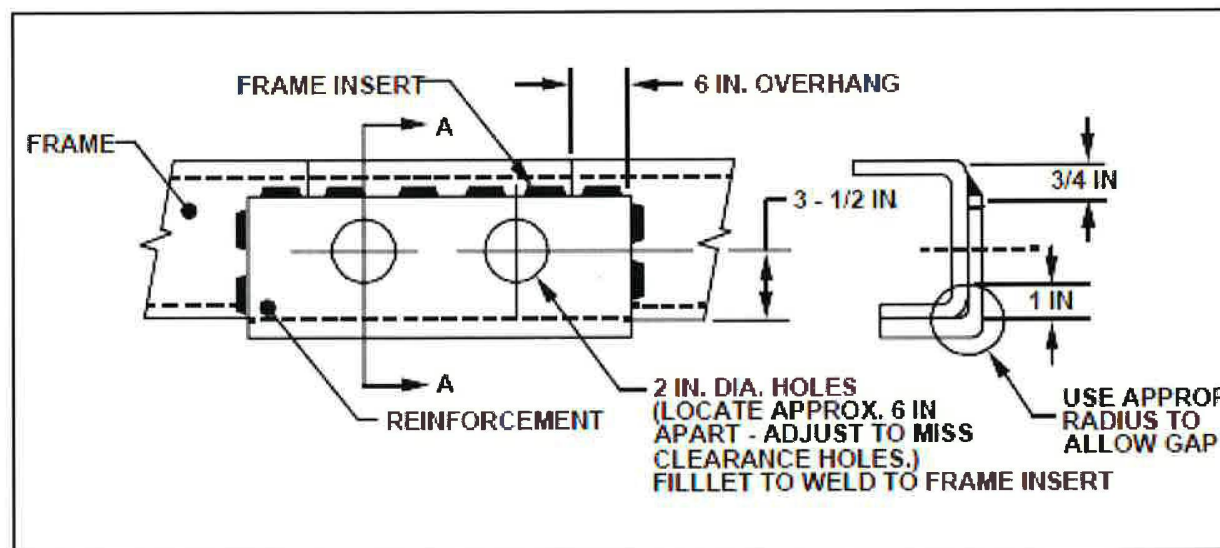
Minimum Required Method for Reinforcement and Welding
